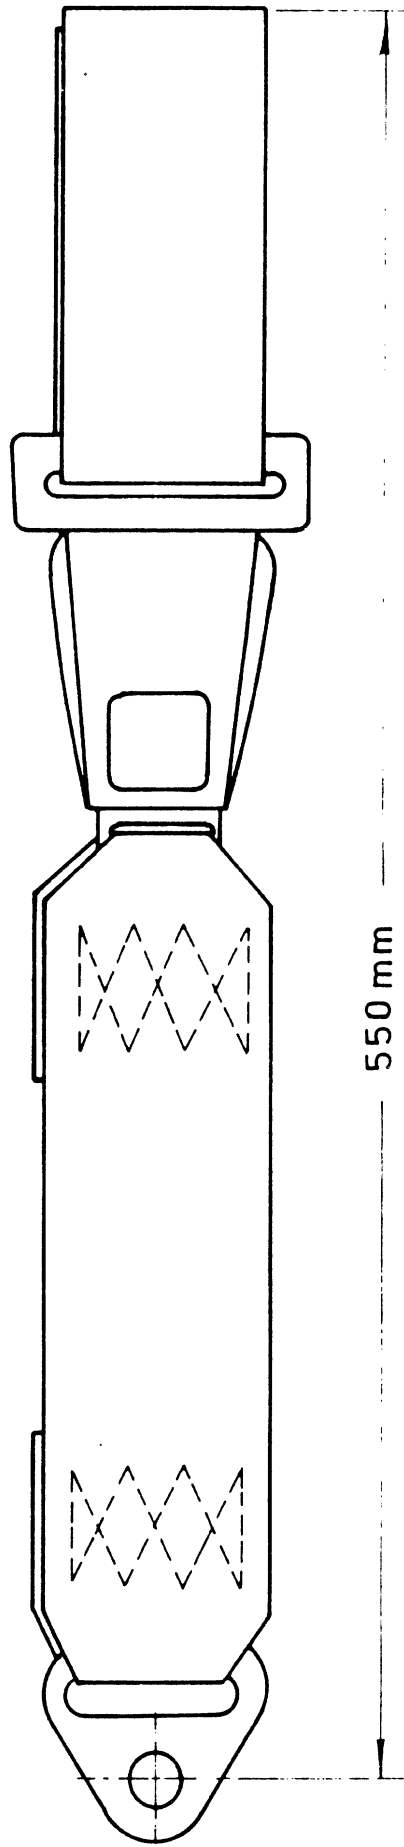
BRAND A PILOT STUDY TEST SPECIMENS
